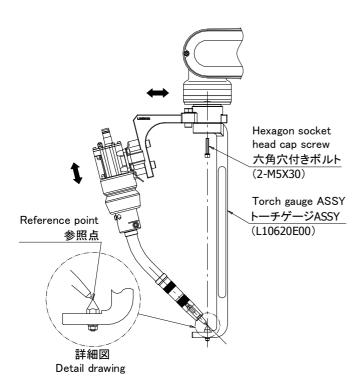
Mounting the torch gauge (for 31° curved torch)
